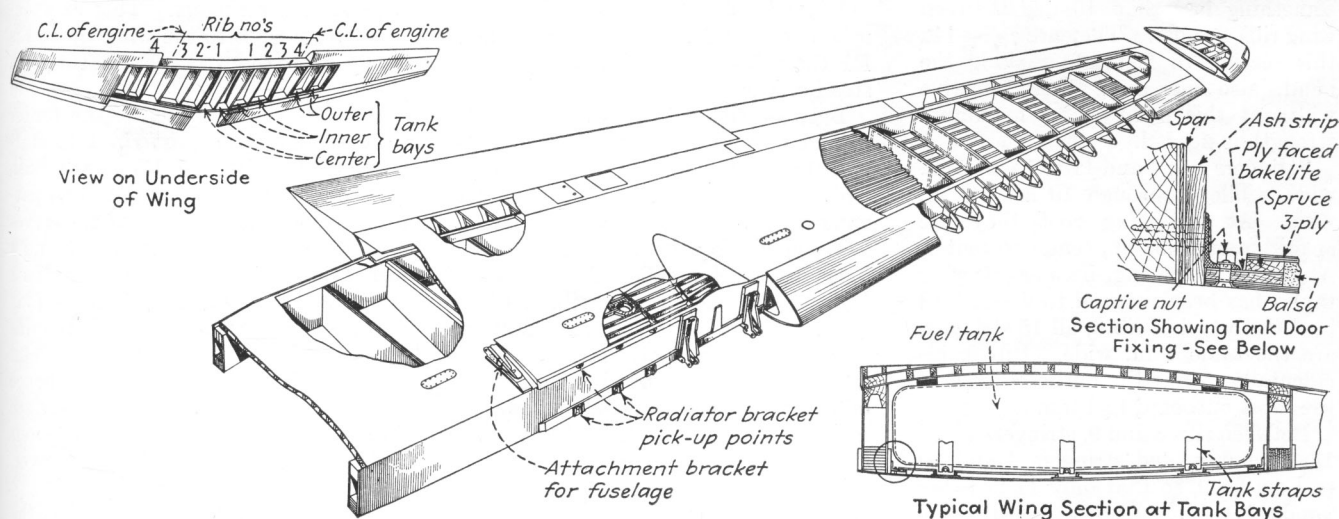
Cutaway views of the wing structure, a typical section at the tank bays, and detail showing the tank door fixing.
